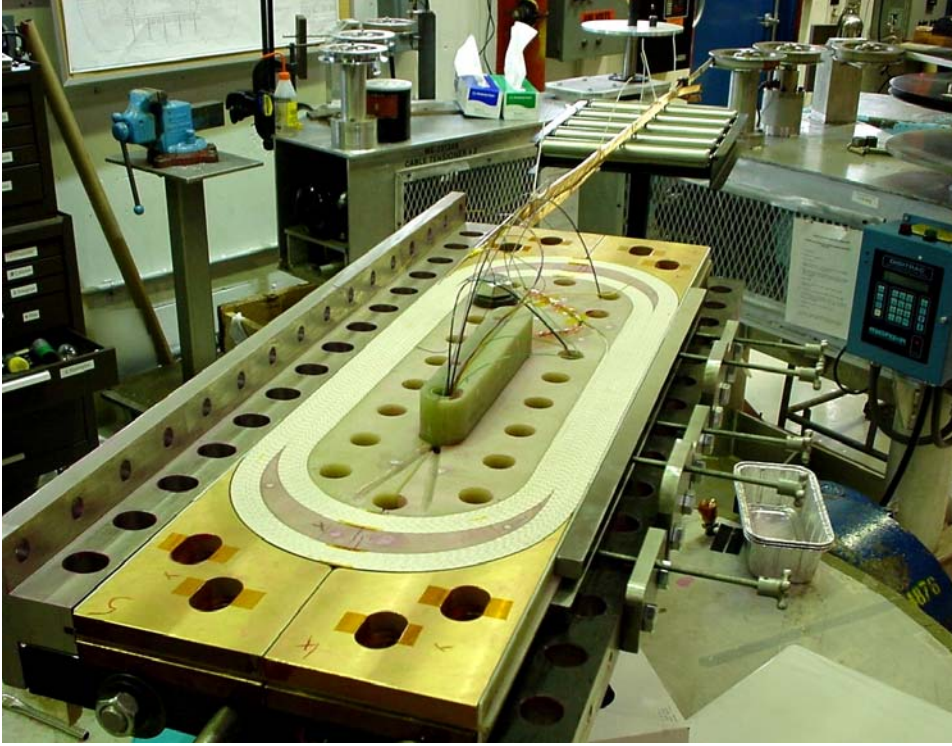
Racetrack magnet during assembly of the mechanical structure. On the right: clamps and side bars used during winding. On the left: final side pusher. The tensioner is shown in the top right corner.
